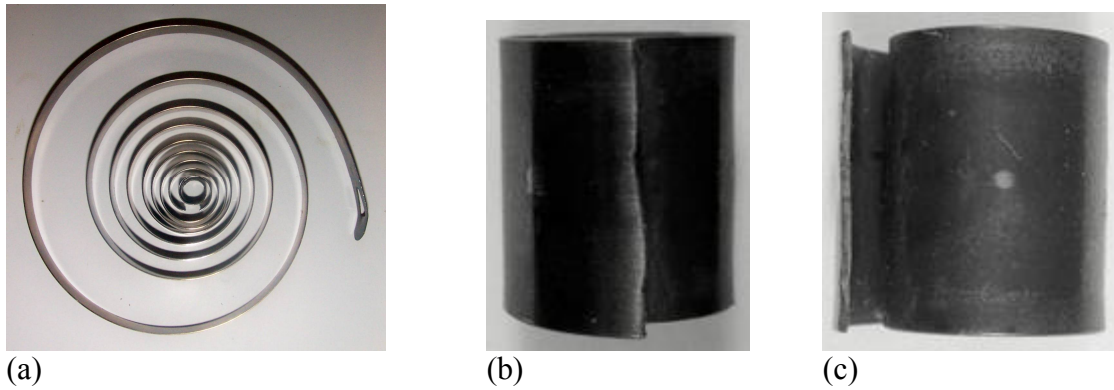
Fatigue failure of a 12 mm wide enclosed mainspring, two coils from the centre of the wound mainspring. Mainspring supplied by courtesy of John Nuttall. (a) General view. (b) Crack profile. (c) Fracture surface.
